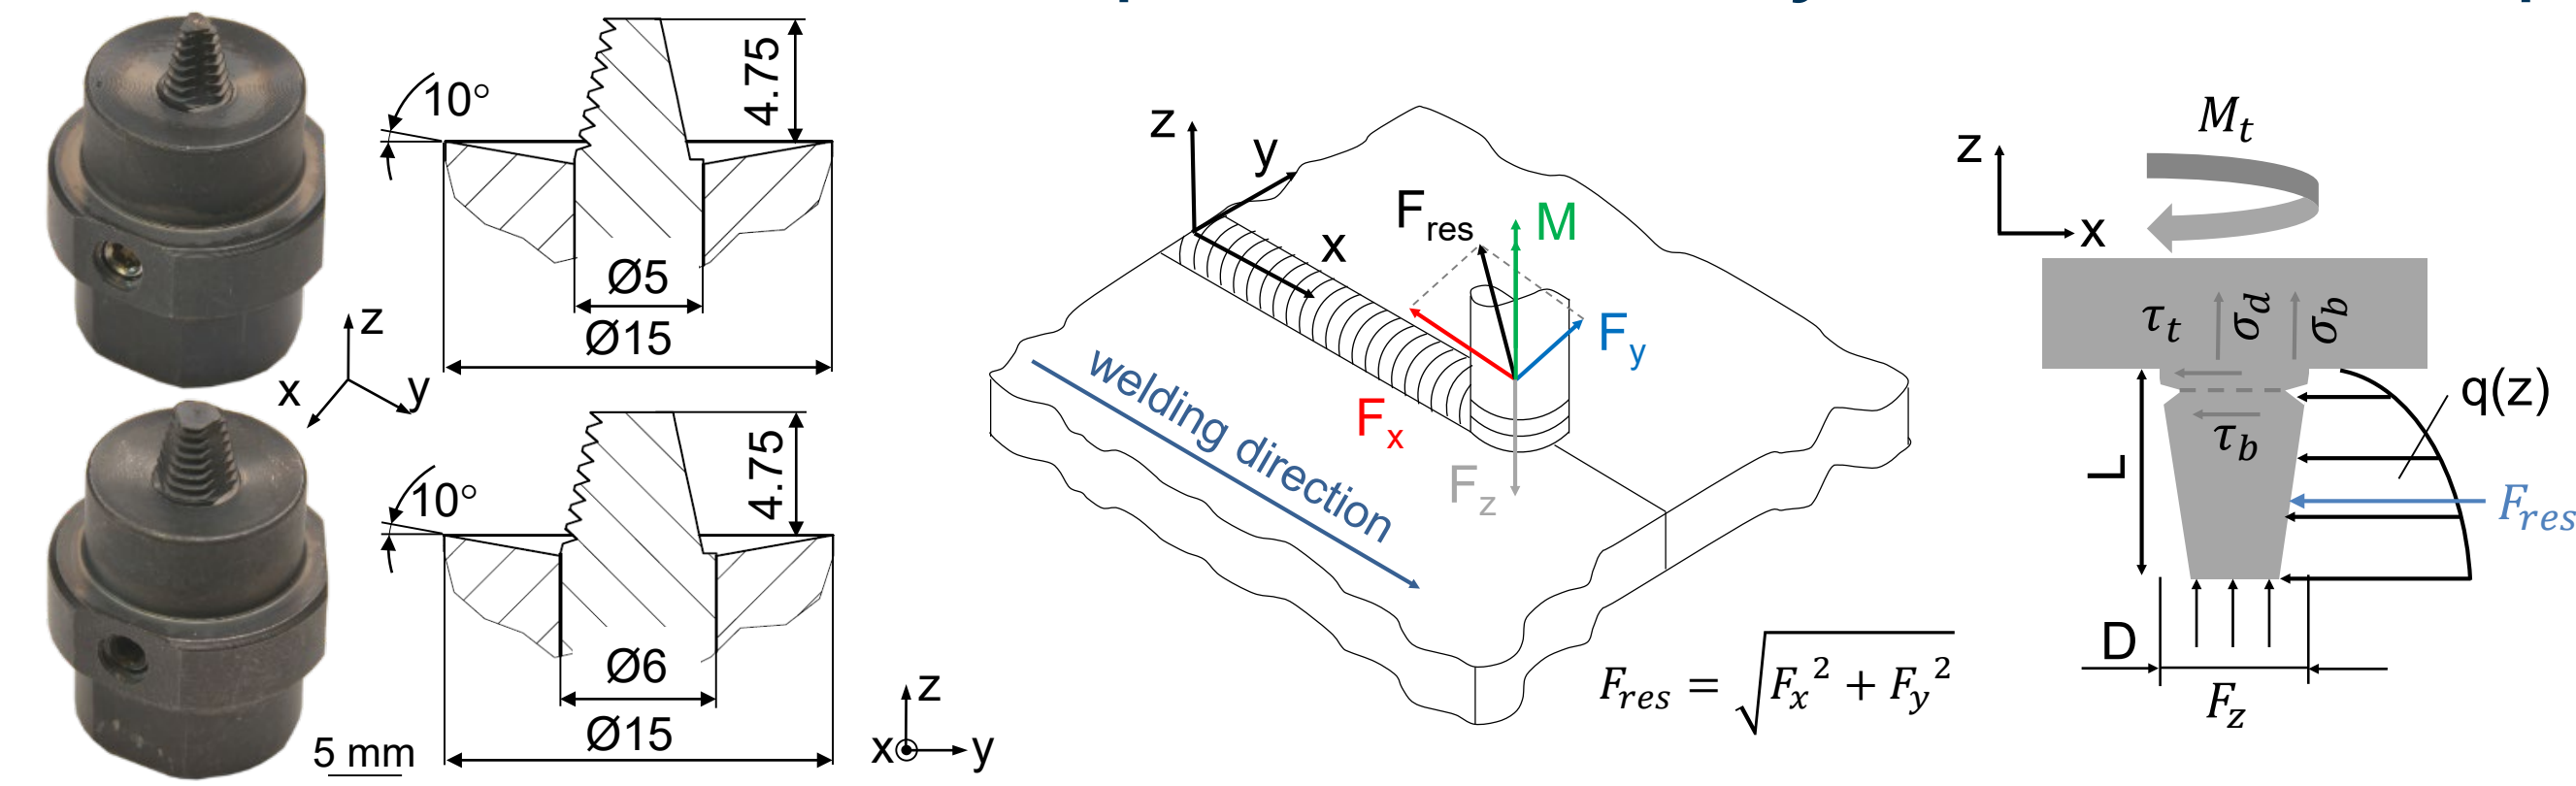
Friction stir welding tools and stress components on the probe (according to Arora et al.).
